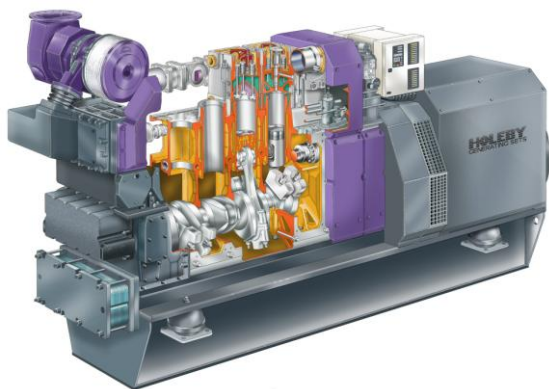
View and partial cross-sectional of the engine MAN B & W L16/24 type [11]
